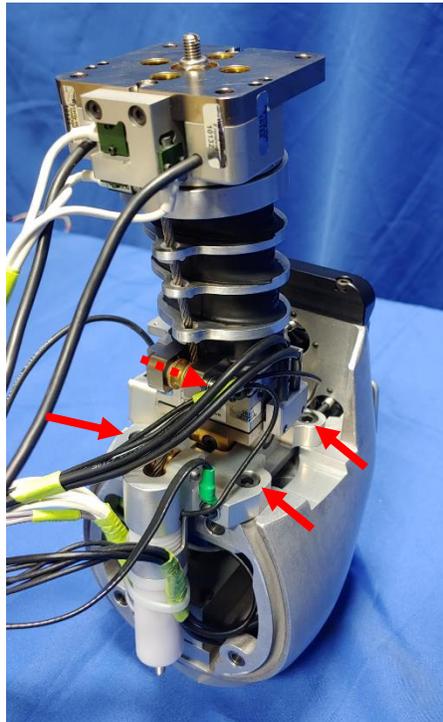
Remove the head from the neck by removing four M6 x 25 LG. SHCS from the bottom of the head/neck platform assembly
